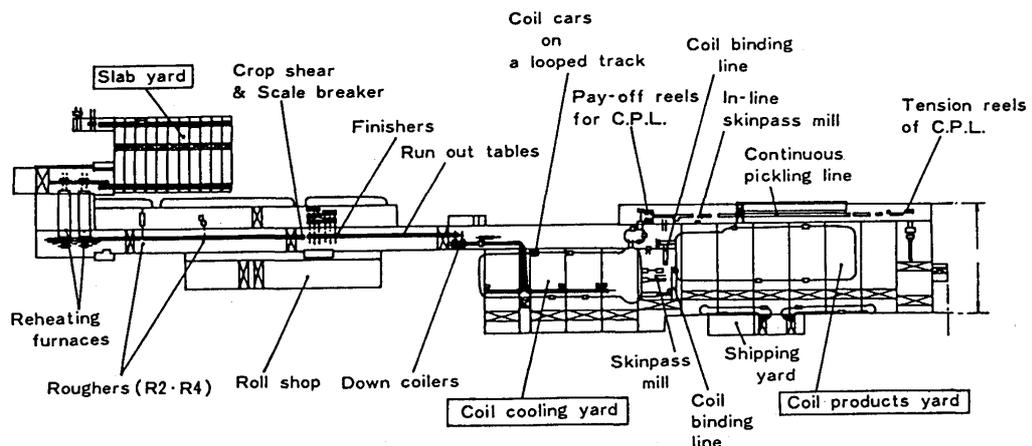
Layout of the hot strip mill with unmanned slab & coil yard
